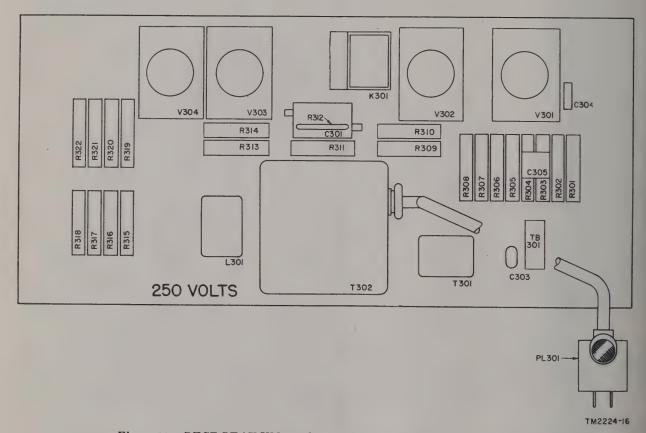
RECT PEAK VM panel, rear view with radiation shield removed.
